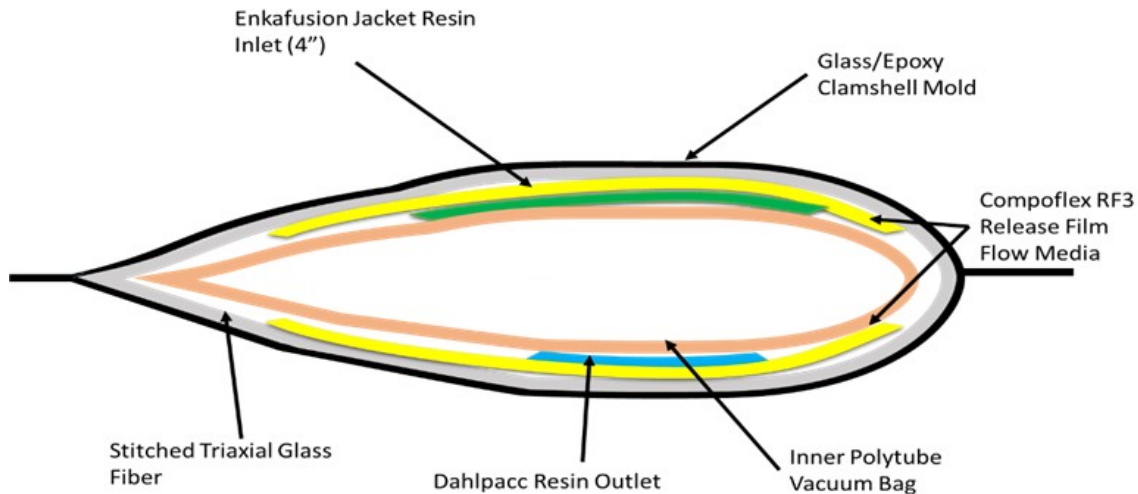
Schematic of materials stack-up in the assembled mold halves based on 64" mold trials
